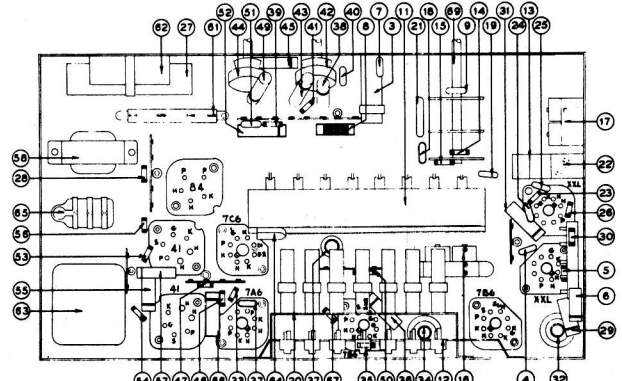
LOCATIONS OF PARTS AND TUBES UNDERSIDE OF CHASSIS — MODEL 41-255
